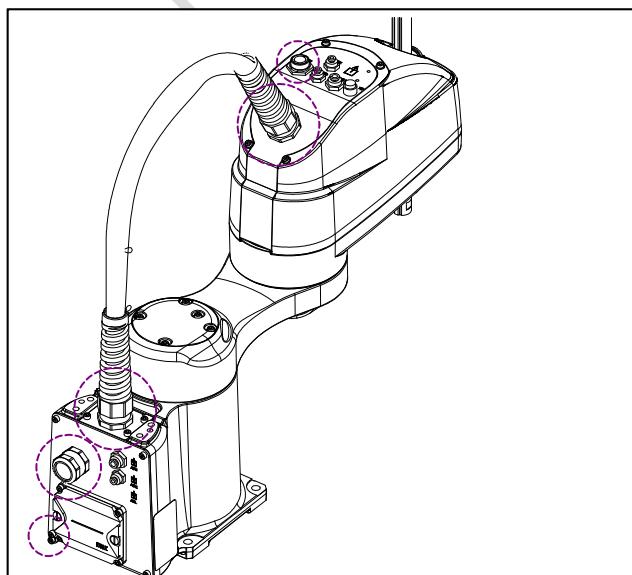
(a) Cable clamp and connector Inspection points
